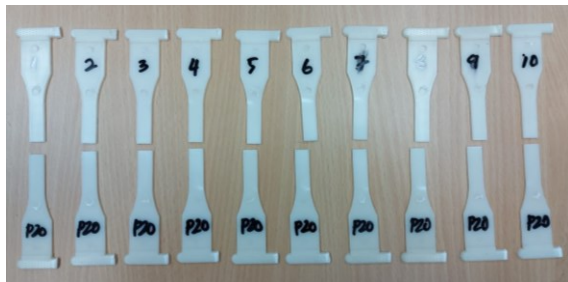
Tensile strength specimen failure area for P20 molded part
